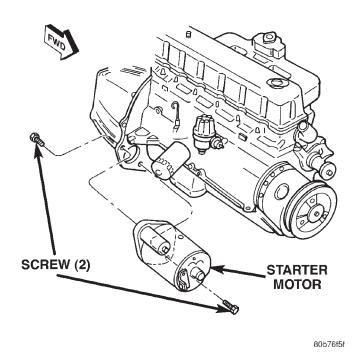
Starter Motor Remove/Install - 4.0L Engine
